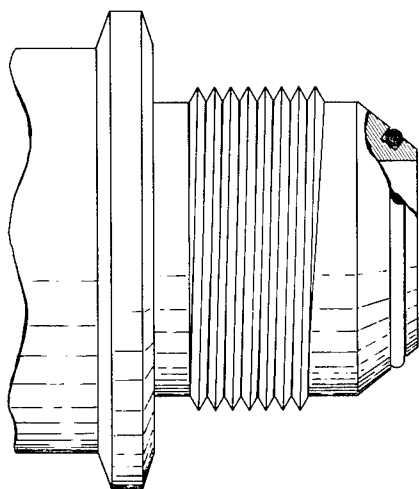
Fingertight assembly is leakproof up to 4000 psi.
